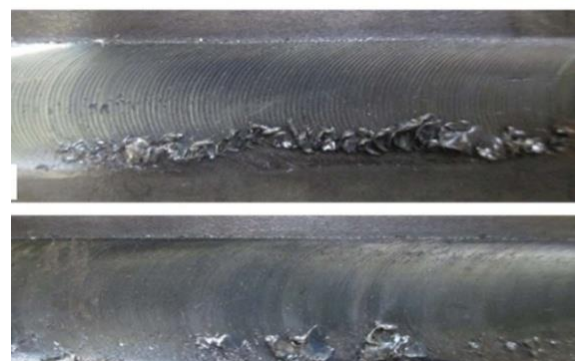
Image of the weld bead- flaky surfaces [4]
